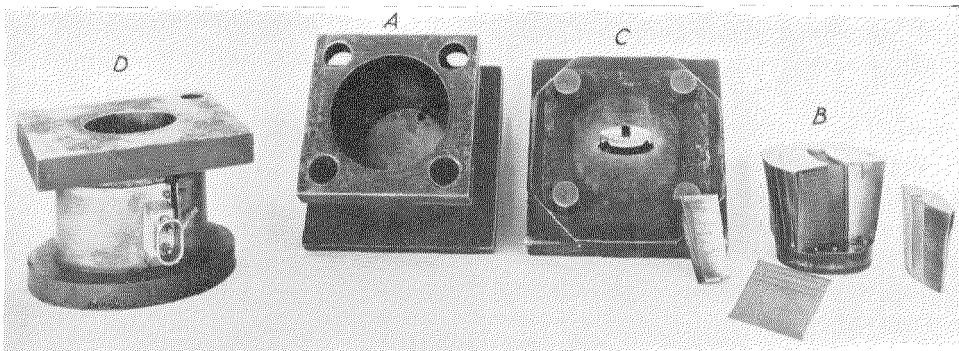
Mould for Terminal Block Shown on Fig. 6.
